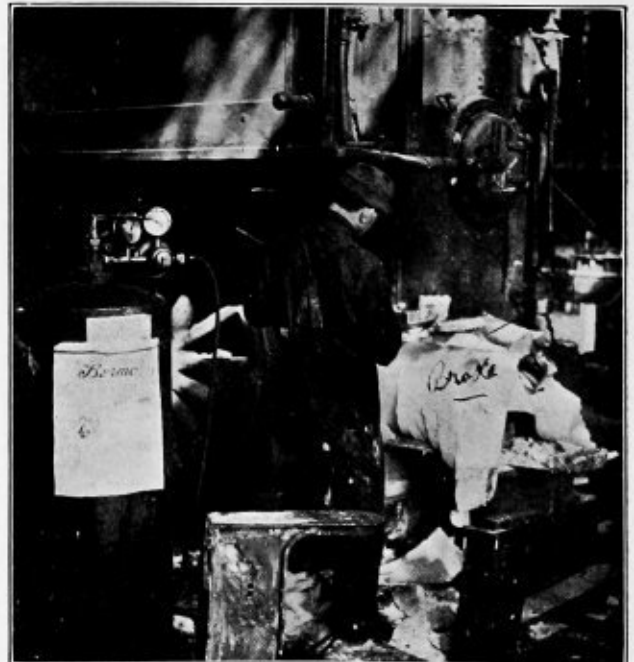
Welding Broken Castings on a Locomotive
